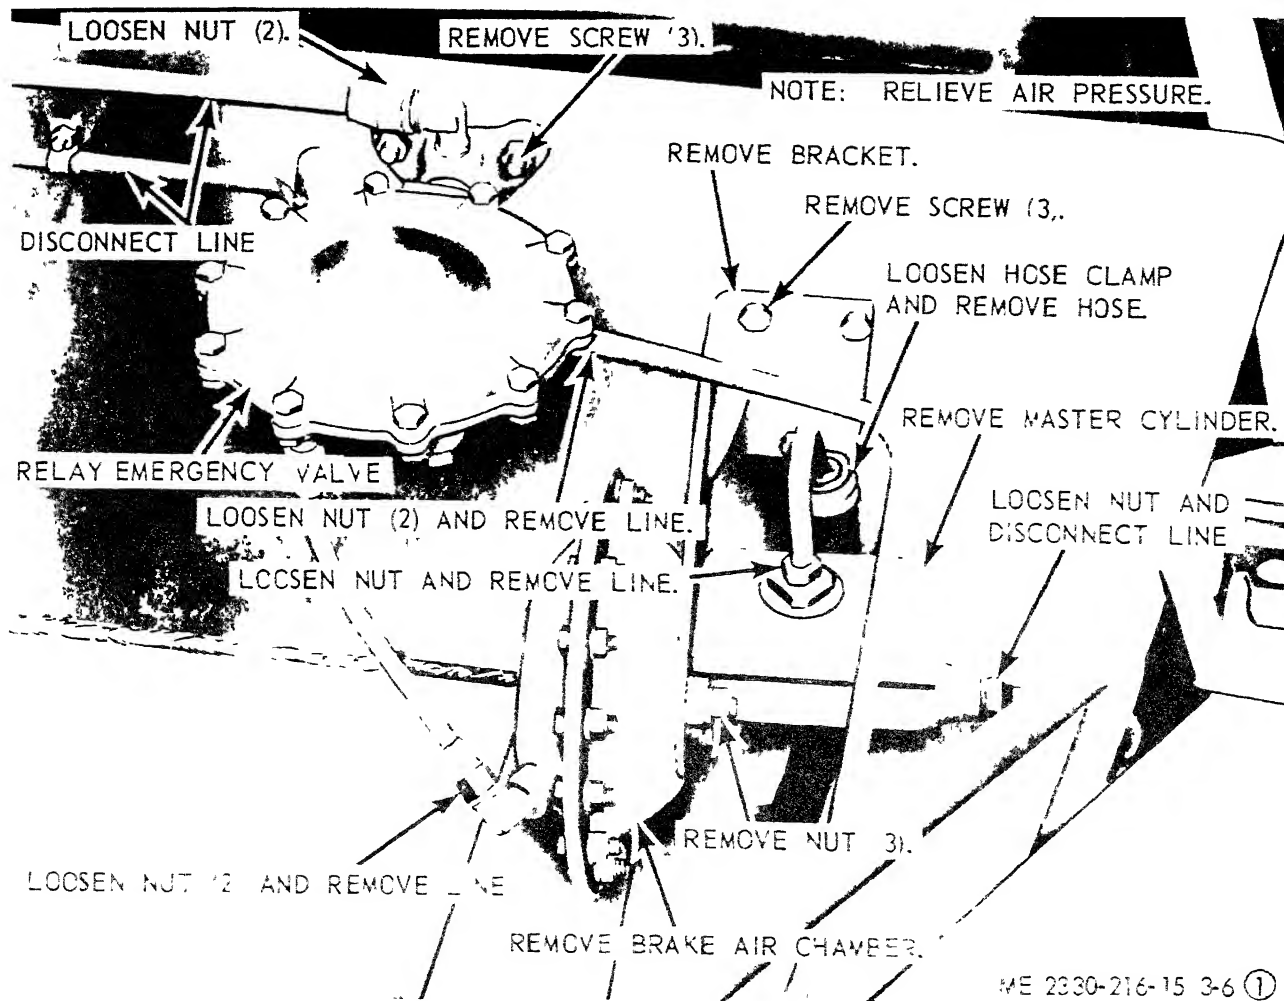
Hydraulic master cylinder, lines, fittings, brake air chamber, and relay valve—removal and installation
